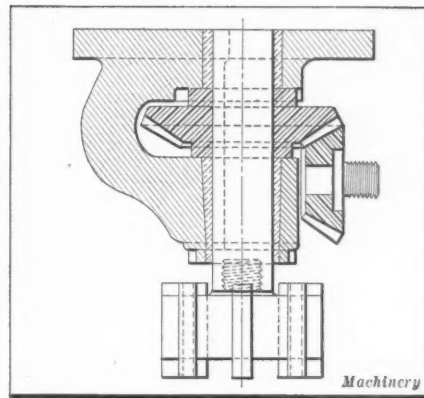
Cross-sectional View of Vertical Cutter-head shown on Machine in Fig. 1
